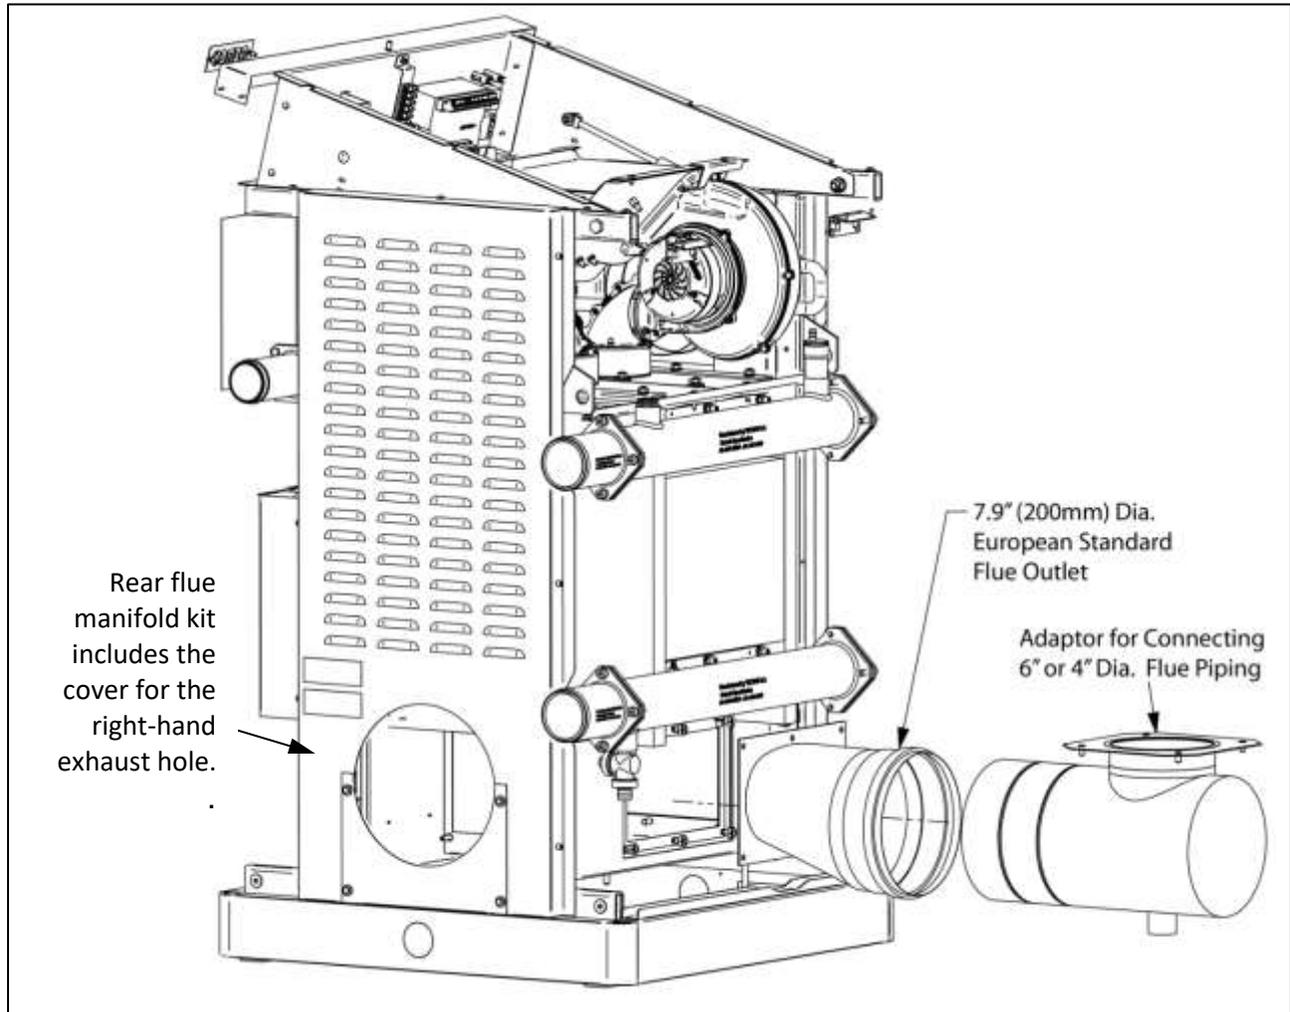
Rear Exhaust Kit for Changing Exhaust Outlet from RIGHT HAND side to REAR on EXT 802, 962, 1123 (only)
